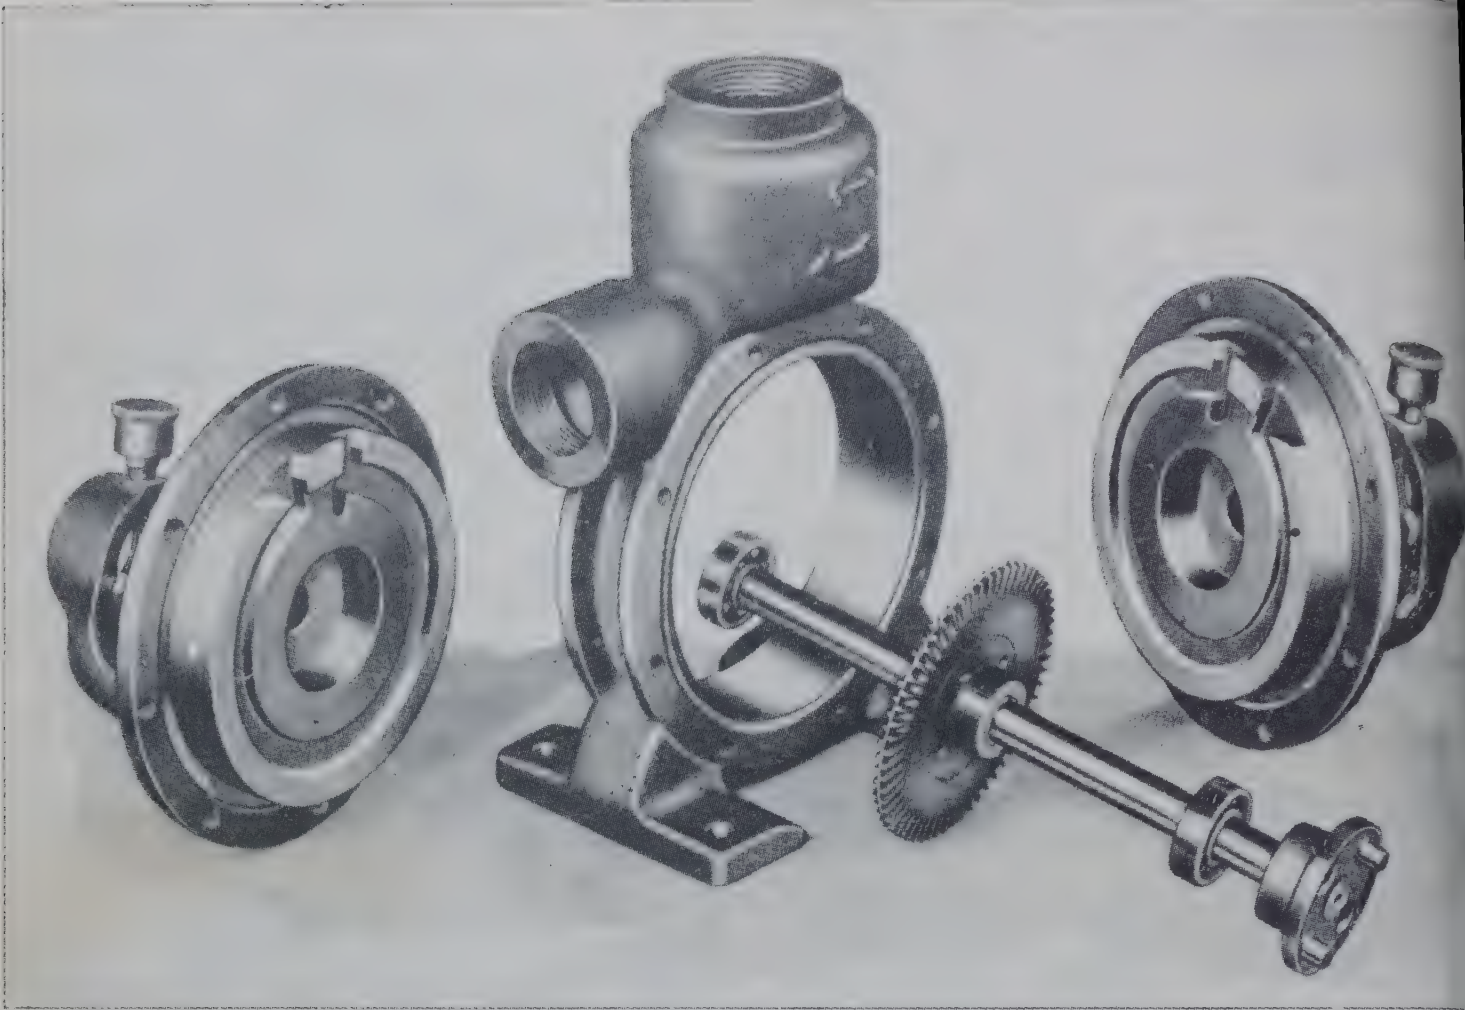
Turbine pump, disassembled. (*Aurora Pump Co.*)
